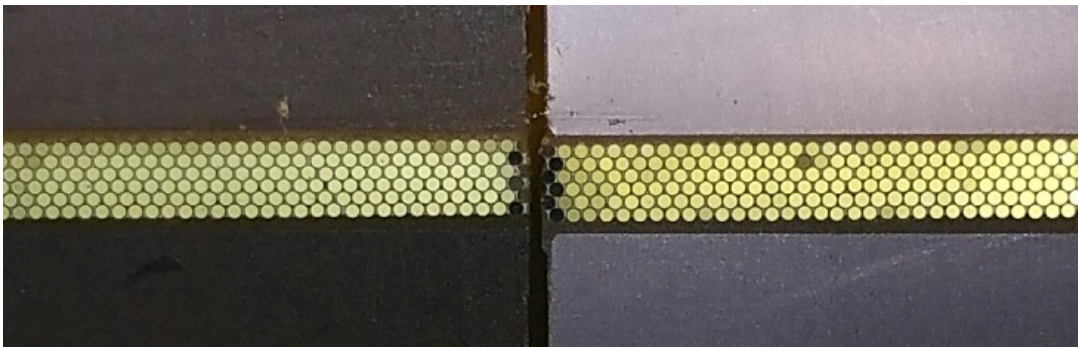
Pin insert in the winding wheel. It has steep edges parallel to the fibres to ensure a good alignment.
